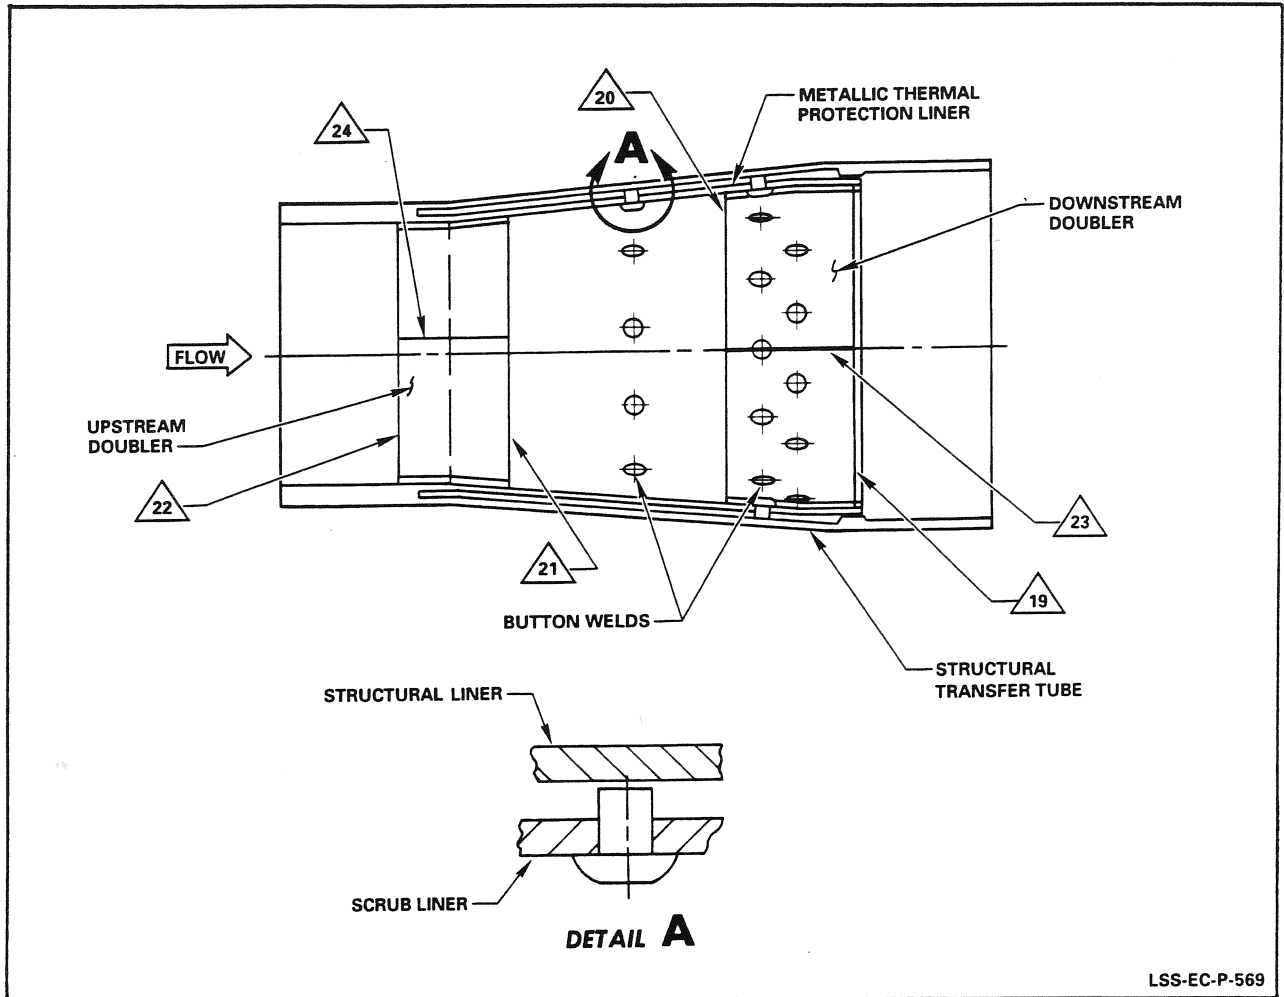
Hot Gas Manifold Liner Weld Joint Locations (RS007051)
